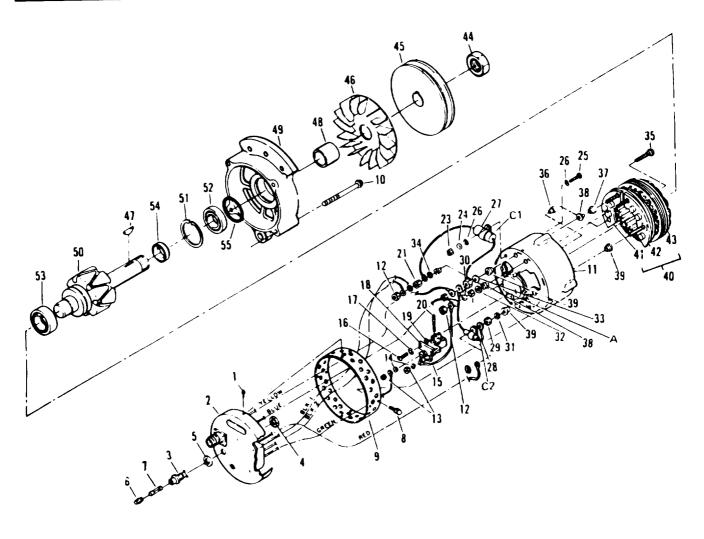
Alternator Assembly, Exploded View (Sheet 1 of 2)
